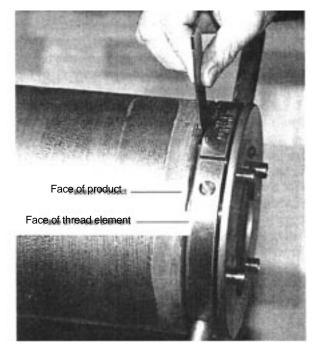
Extreme-Line Thread Plug Gauge Installed Hand-Tight and Seal Plug Advanced (Note use of Go-No-Go Gauge.)
